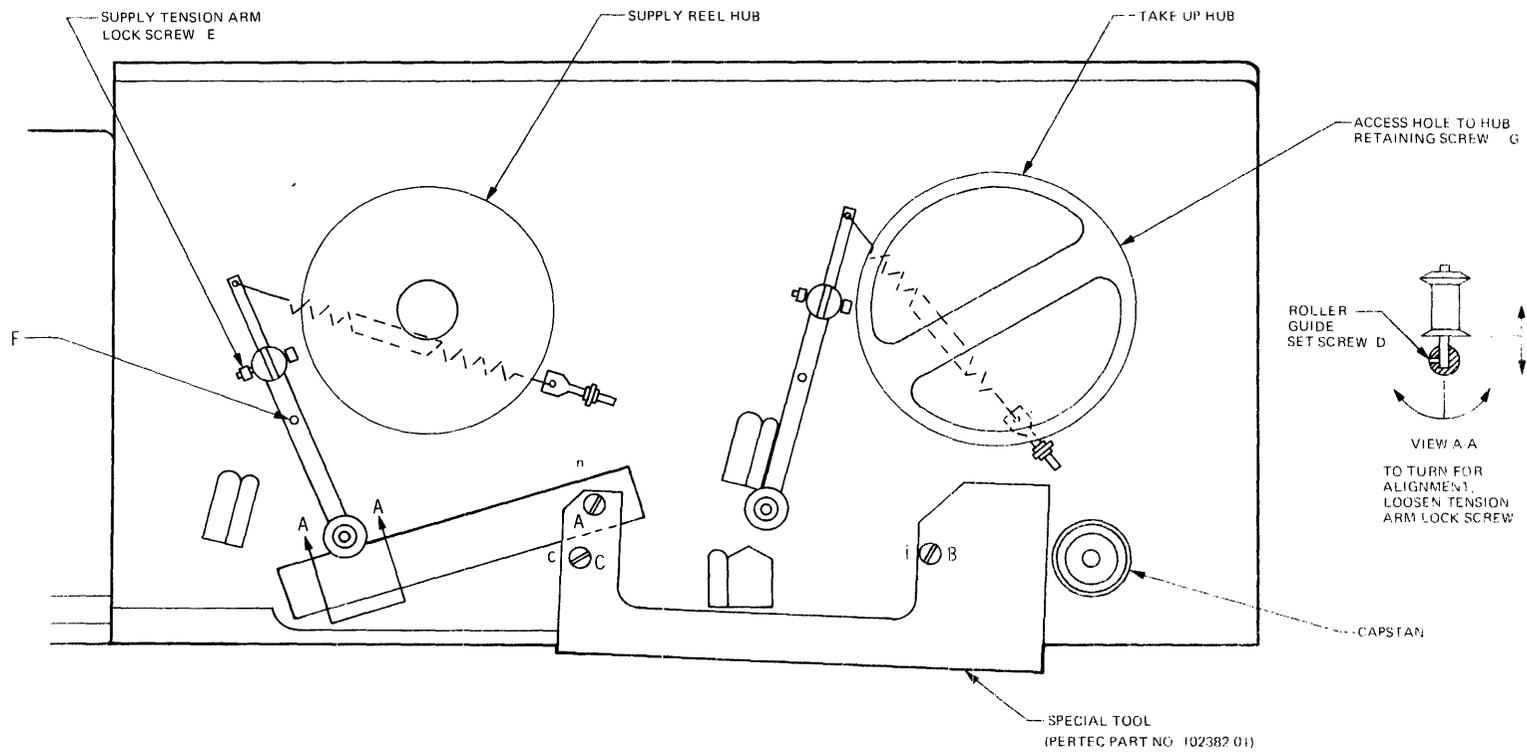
Supply Reel Tension Arm Guide Roller Adjustments
